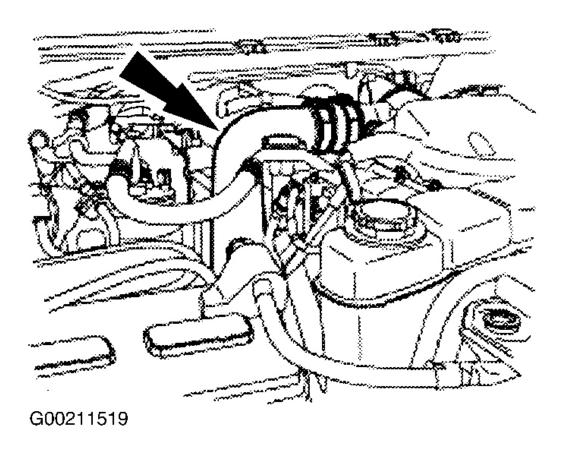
Removing Air Charge Cooler Inlet Tube (Excursion & "F" Series) Courtesy of FORD MOTOR CO.
